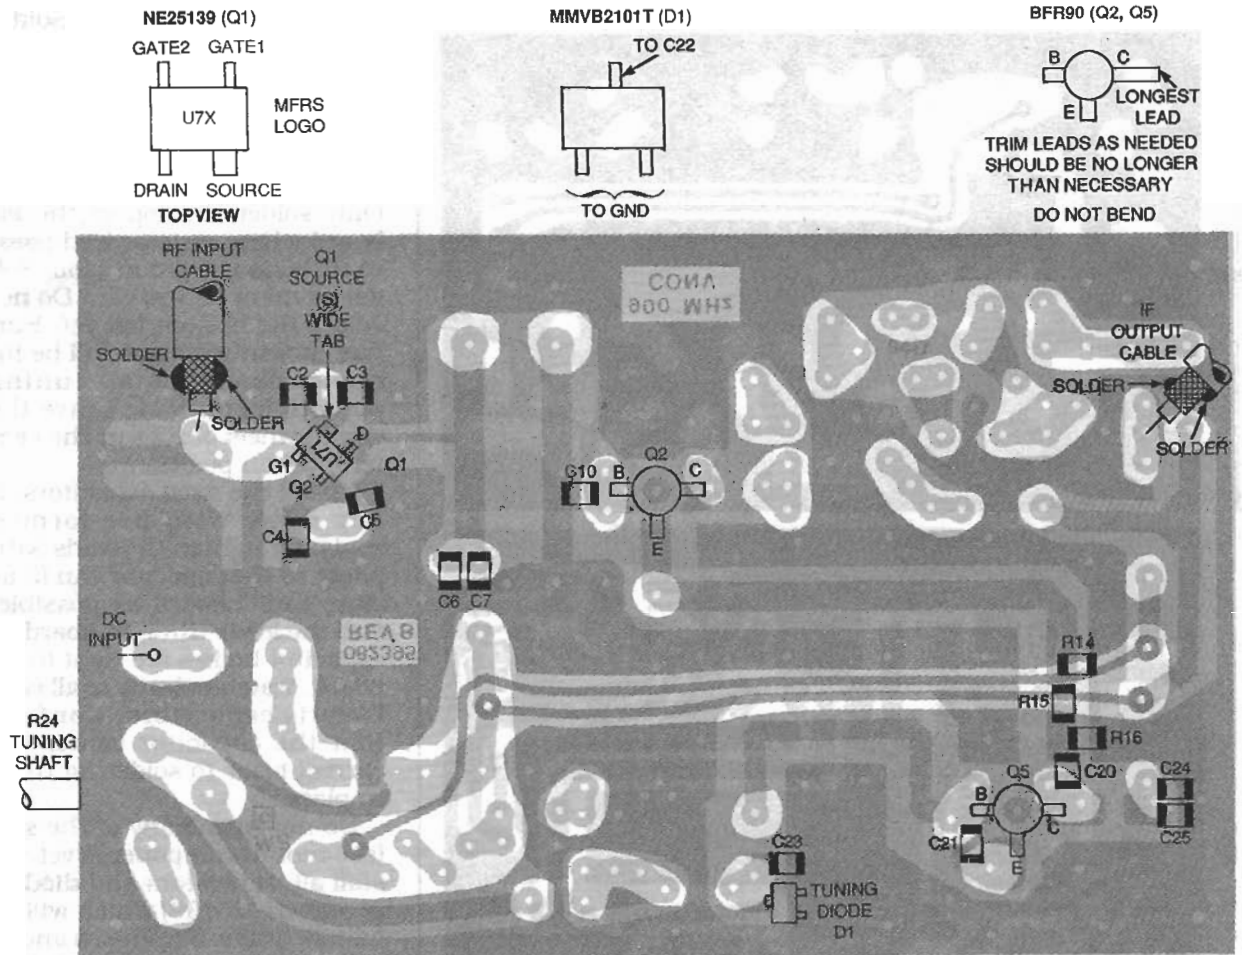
BOTTOM SIDE OF PC BOARD for the 900-MHz downconverter is shown with parts locations identified. Cable lengths should be just long enough to provide suitable length when PC board is installed in a metal case.
